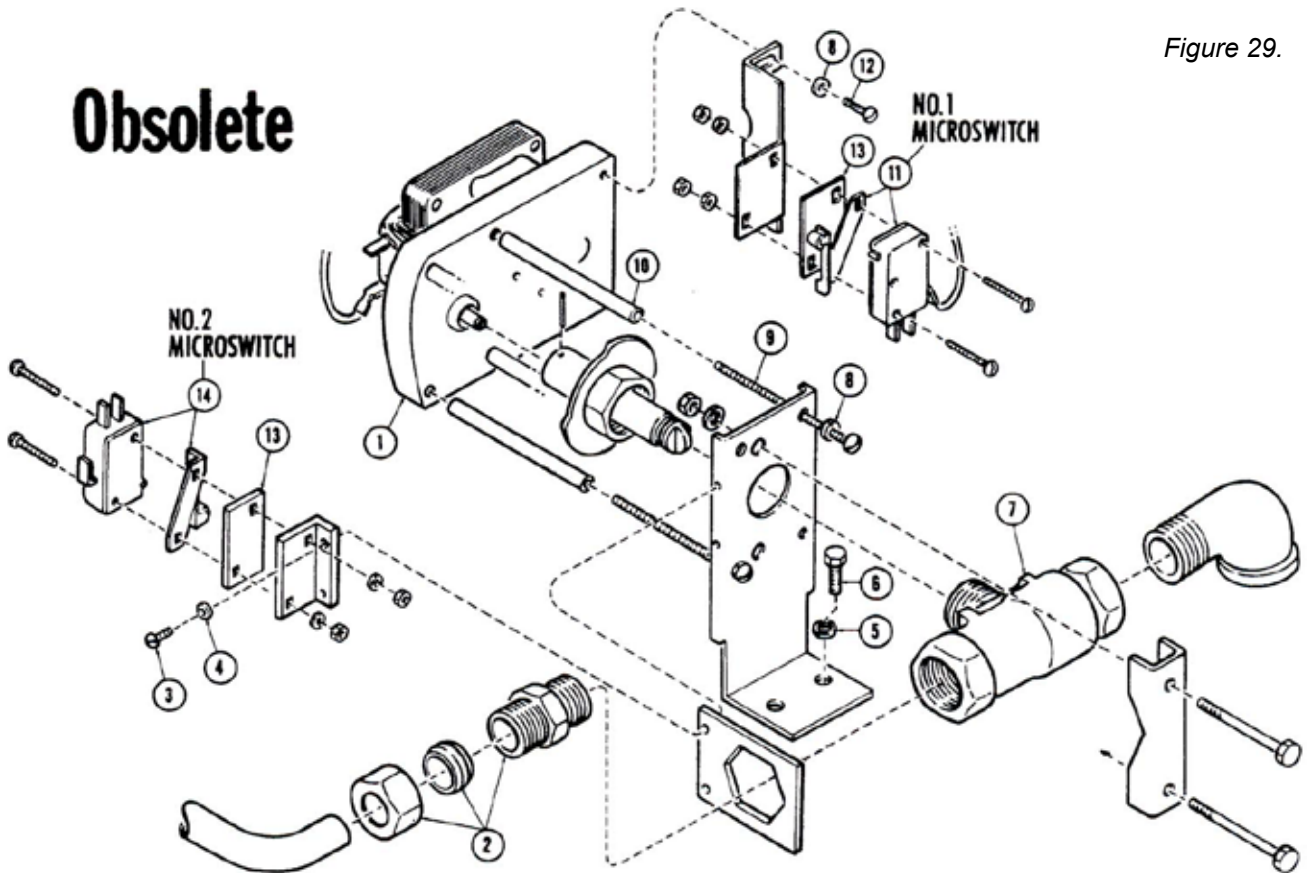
Steam Inlet Valve Assembly (Obsolete)
